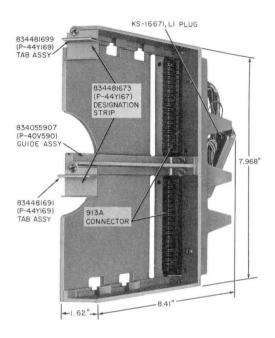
69B Apparatus Mounting (With Guide Assembly)
